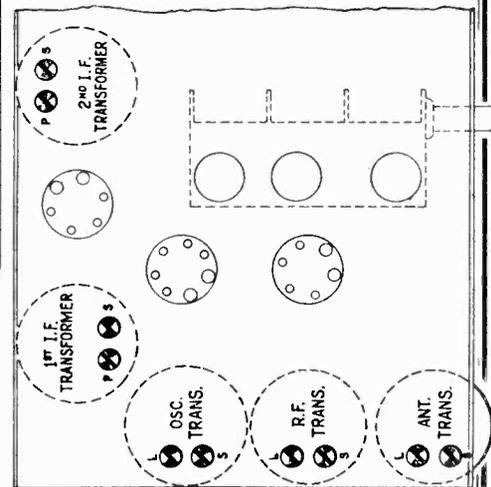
Location of Line-up Capacitors—Viewing bottom of chassis
